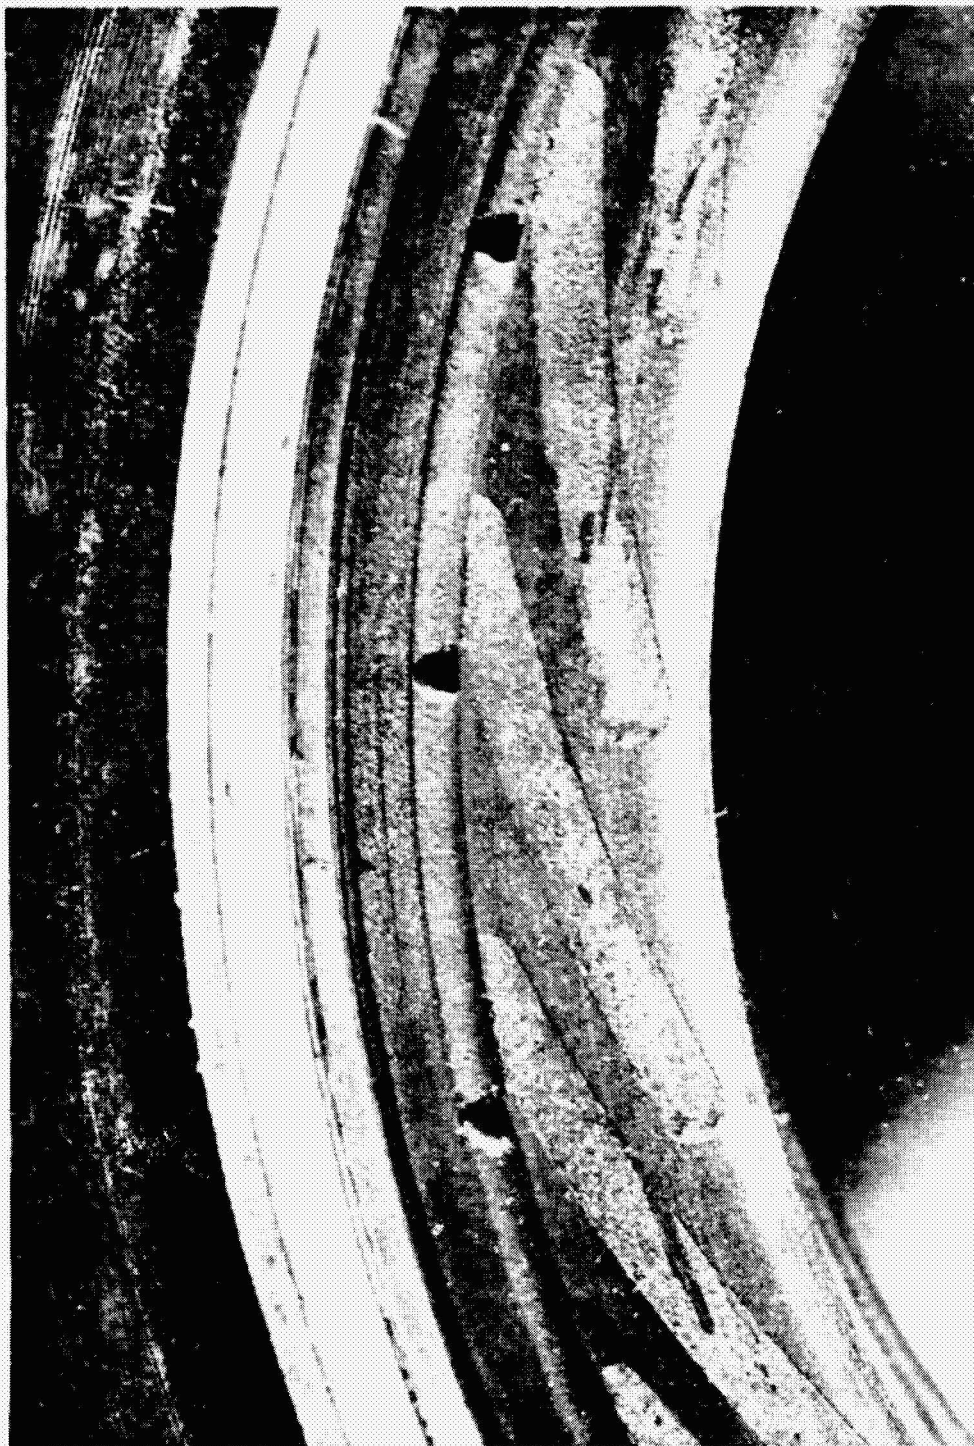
Aft Seal Spiral Grooves After Build I Testing.
